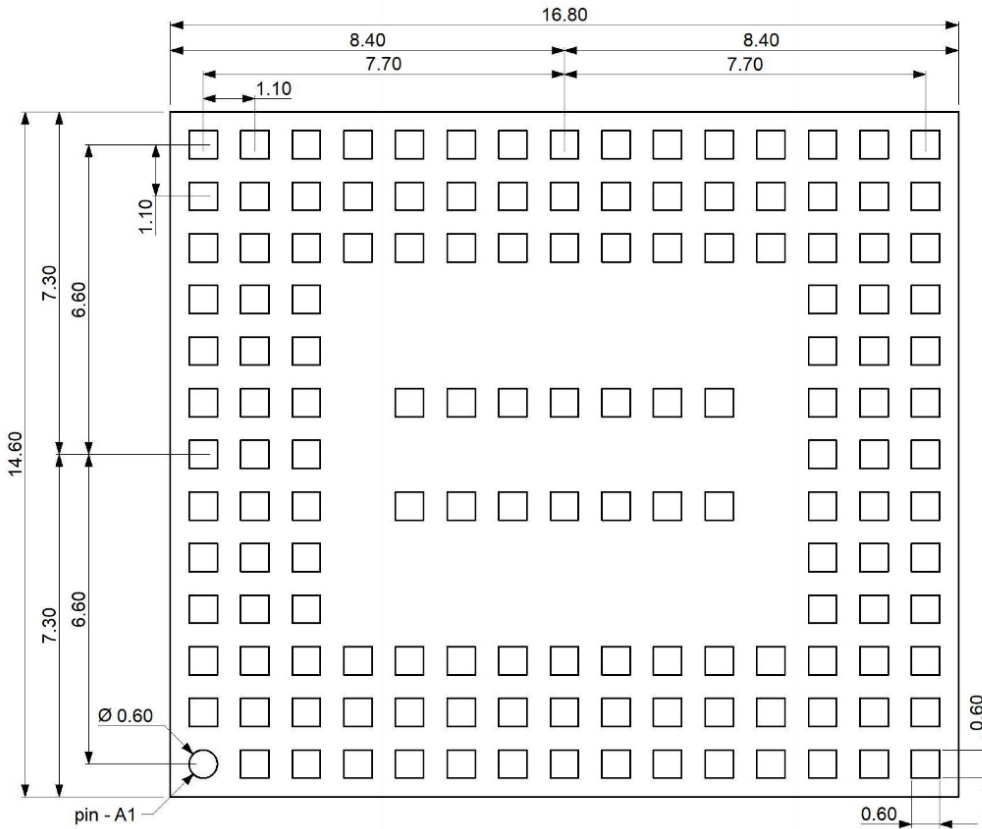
IRIS-W101 recommended PCB footprint (top view)
